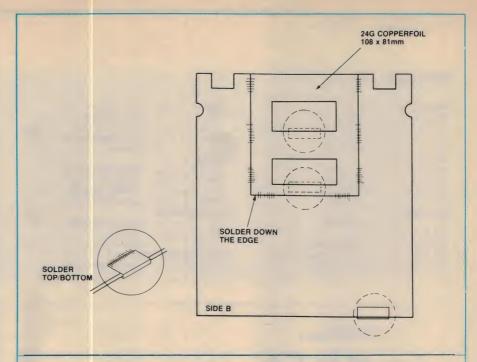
Copper foil soldering positions. Three pieces of foil should be soldered into position. The larger square piece of foil is soldered on to cover two of the small pieces.
